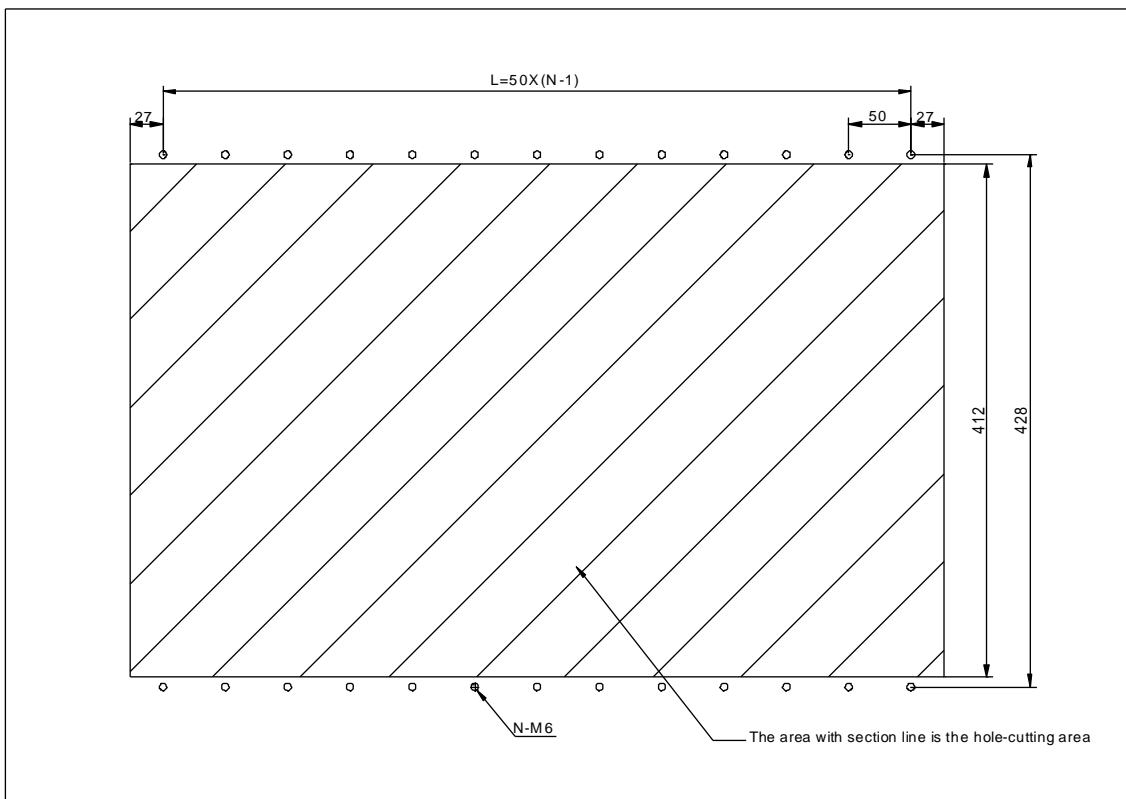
Cut-out drawing in the flange installation for the 380V rectifier and inverter units
